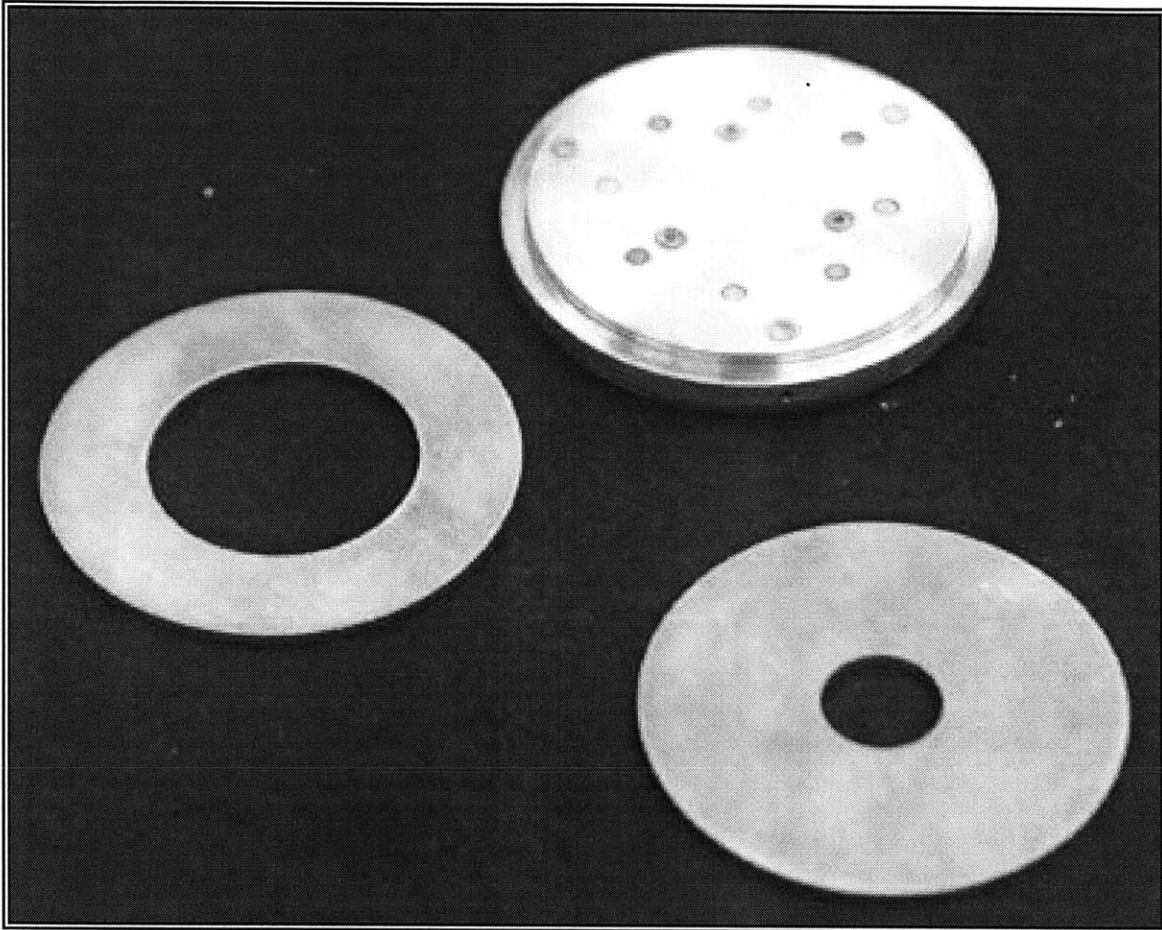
The valve bulkhead face that seals against the inlet valve is shown along with the polished sealing faces of both the inlet and outlet valves
